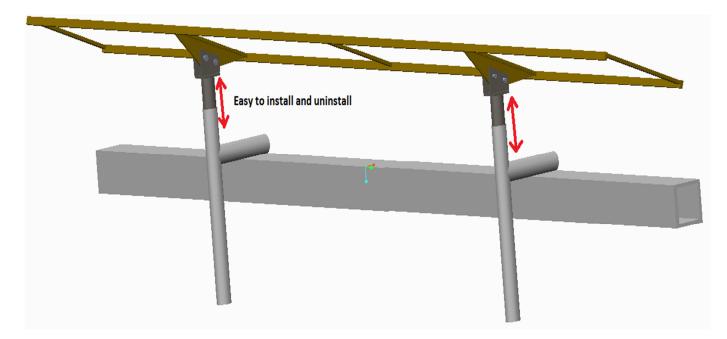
The cylindrical pipe fits in the vertical column pipe making the whole solar support structure sturdy. The whole support assembly can be easily removed by just lifting off the cylinders.
